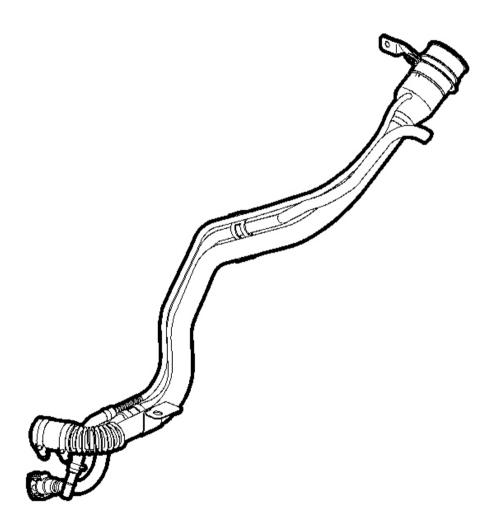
View Of Fuel Fill Pipe Courtesy of GENERAL MOTORS CORP.
